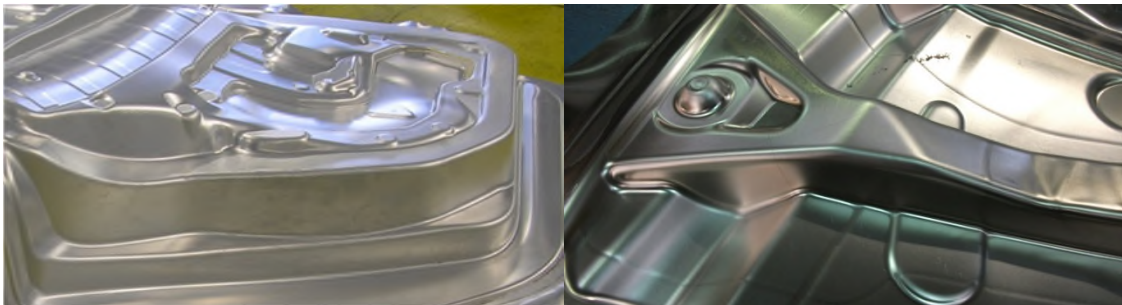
a) Boot panel formed in AA7020, b) B pillar formed in AA7020.
